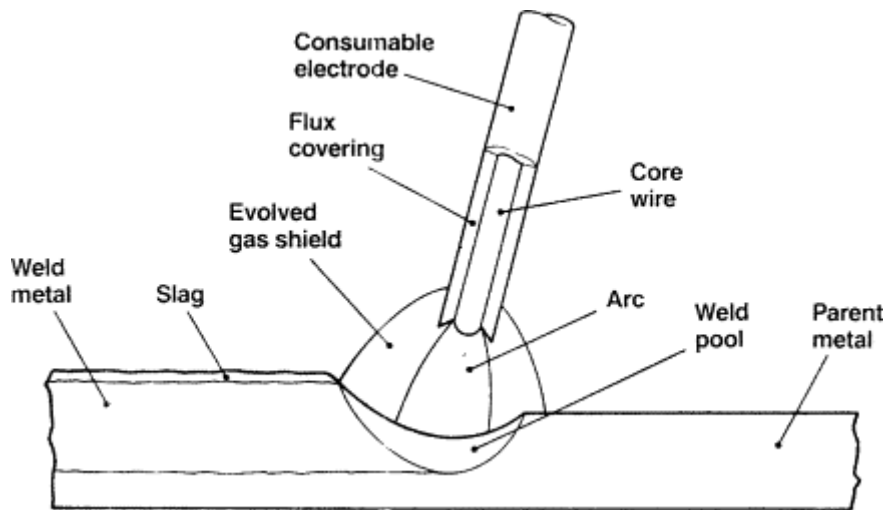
MMA welding (Blunt & Balchin, 2002)
